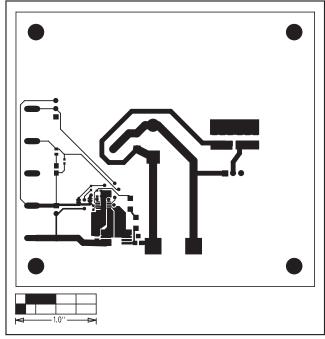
MAX8622 EV Kit PC Board Layout—Component Side
